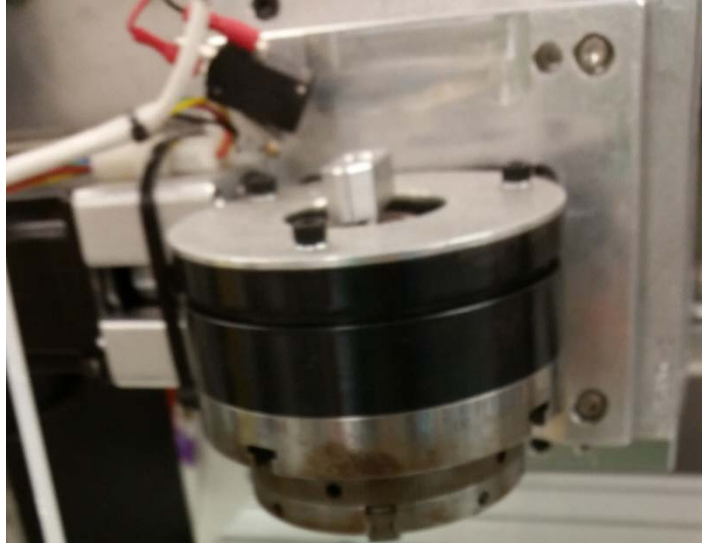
Four Tooth Chuck on rotary spindle (A axis).
